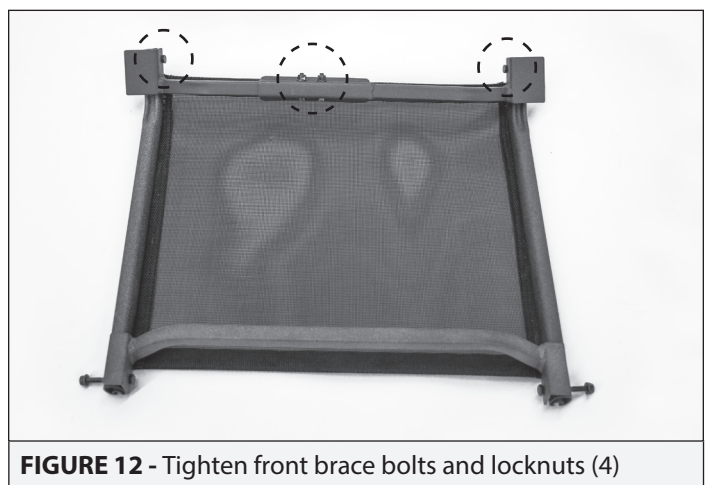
Tighten front brace bolts and locknuts (4)
